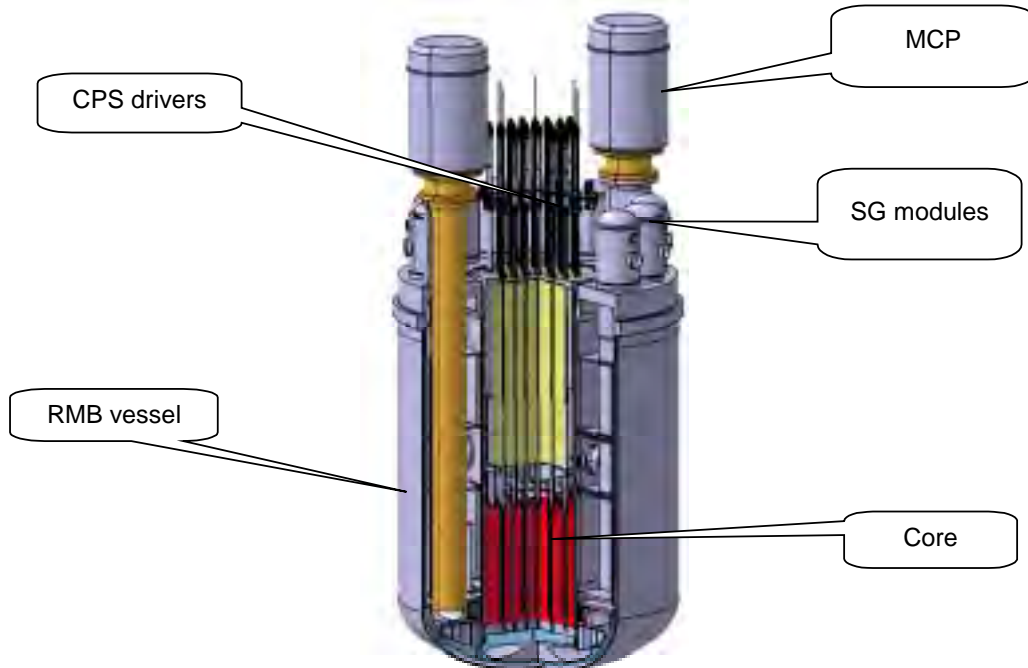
Equipment arrangement in the reactor monoblock vessel
